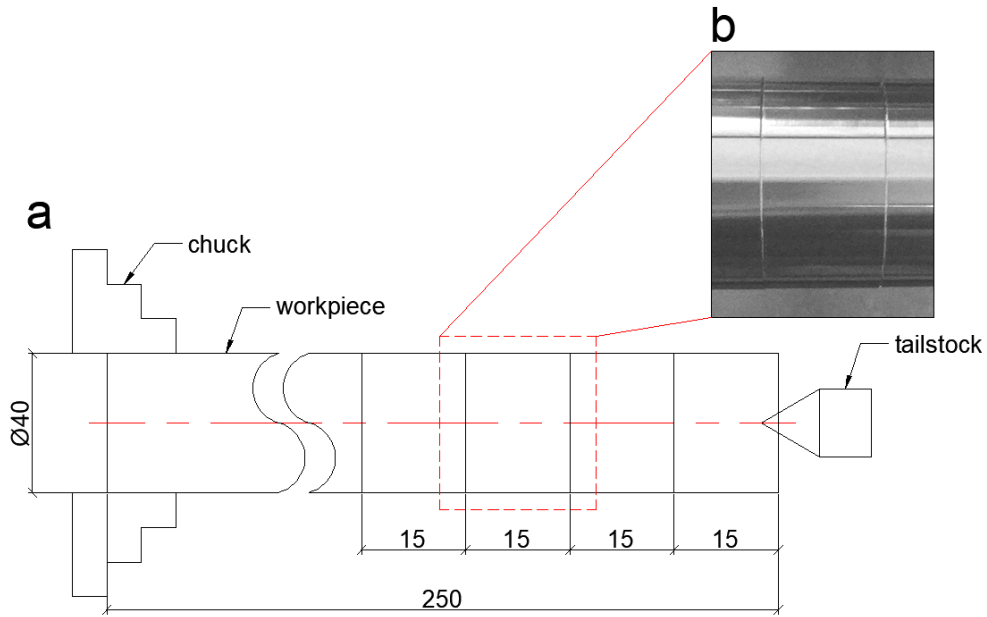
Schematic representation of the machined test specimen; a) General drawing, b) Close-up (dimensions are mm)
